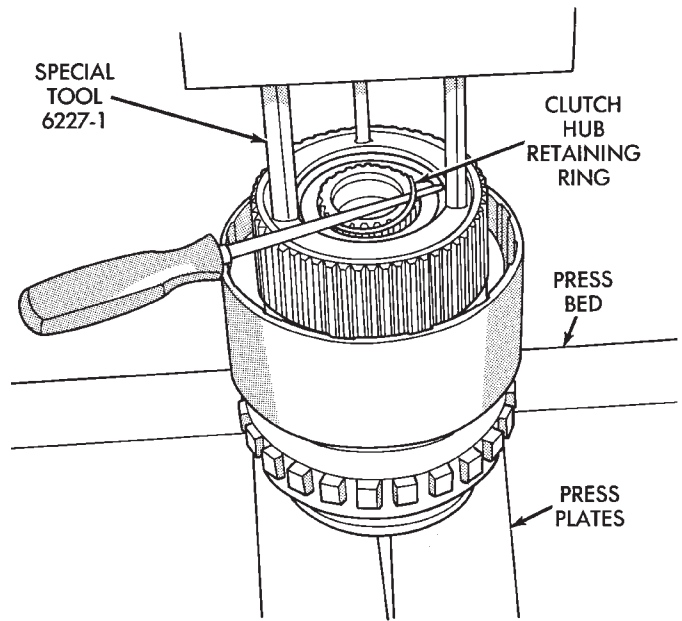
Direct Clutch Hub Retaining Ring Removal
